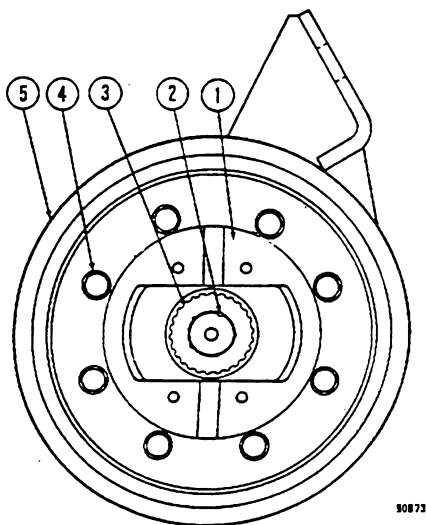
PARKING BRAKE DRUM REMOVAL
